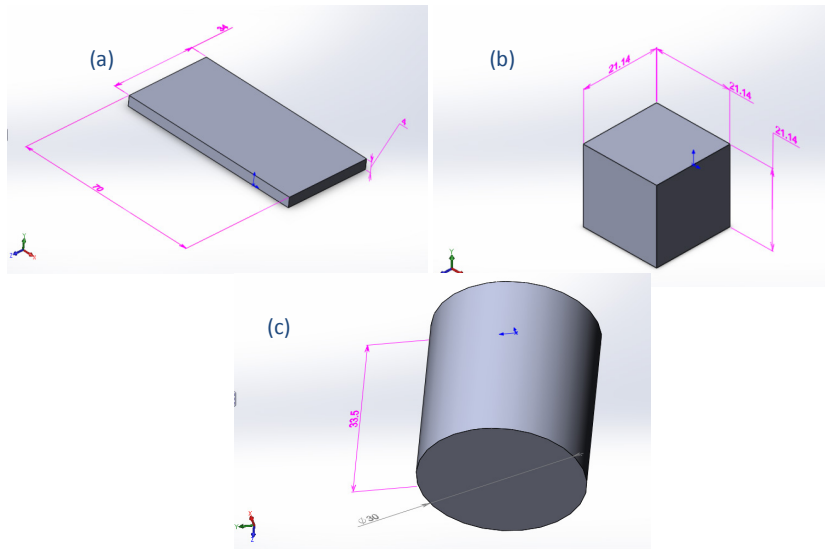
3D Drawing of charges (Measurements in mm): (a) rectangular charge, (b) cubic charge (c) cylindrical charge
